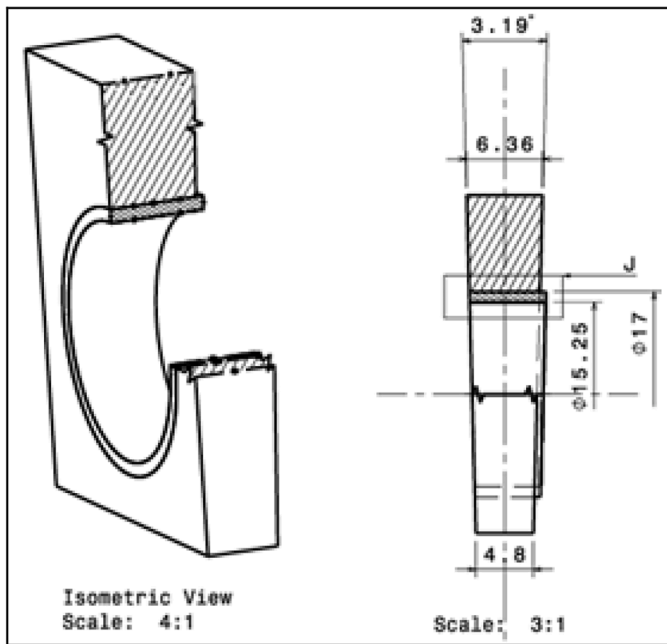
ENEA Technical drawing for the manufacturing of the monoblocks.
